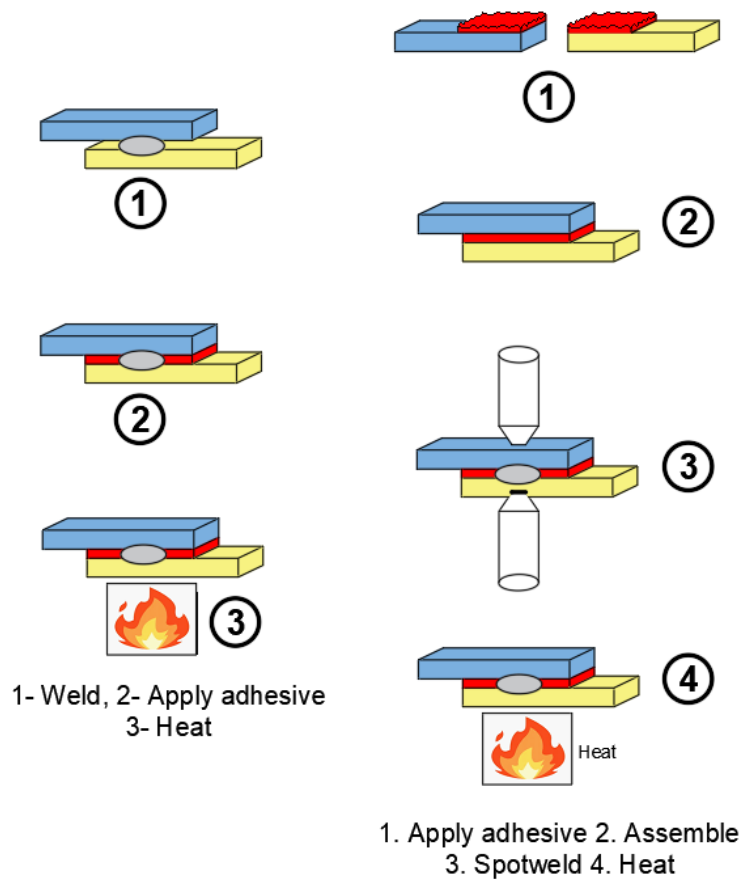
Weld bonding: (a) the flow-in technique, (b) the weld-through technique.
